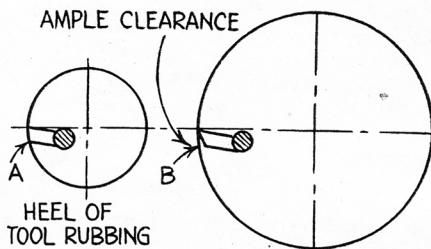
This drawing shows how a certain angle of front clearance may be too small for one hole but satisfactory for a large hole. At A, the heel of the tool is rubbing. At B, in the larger hole, there is ample clearance.
